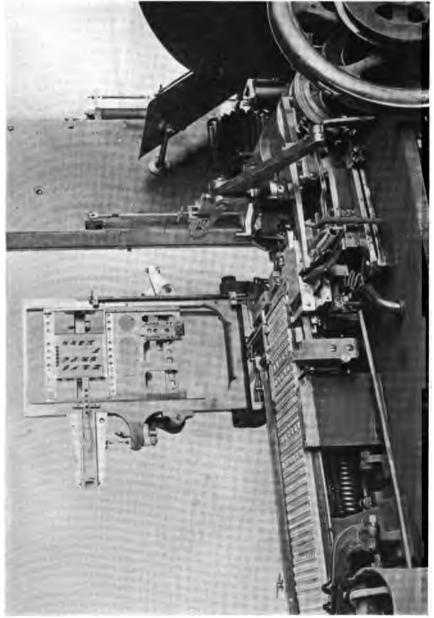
Graphotype (new model) used as a large-work sorts-caster; enlarged view taken from the left-hand side. To face page 412.]
